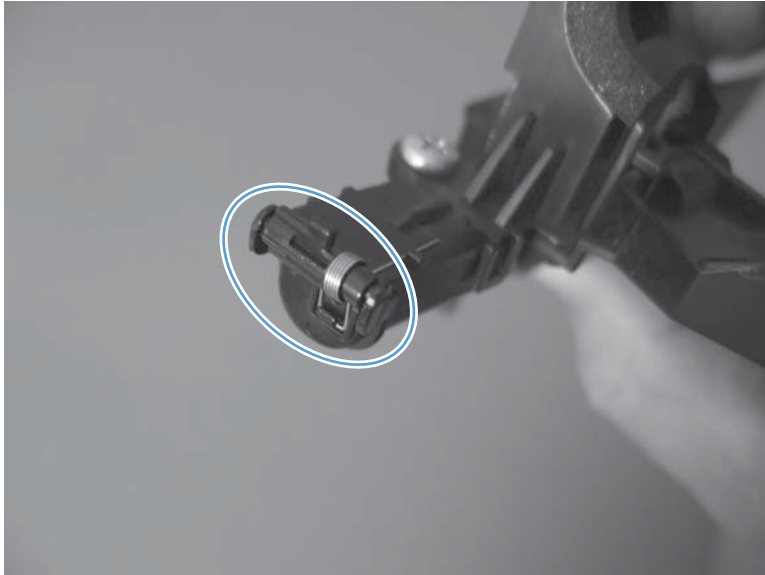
Remove the residual toner feed motor (7 of 7)
